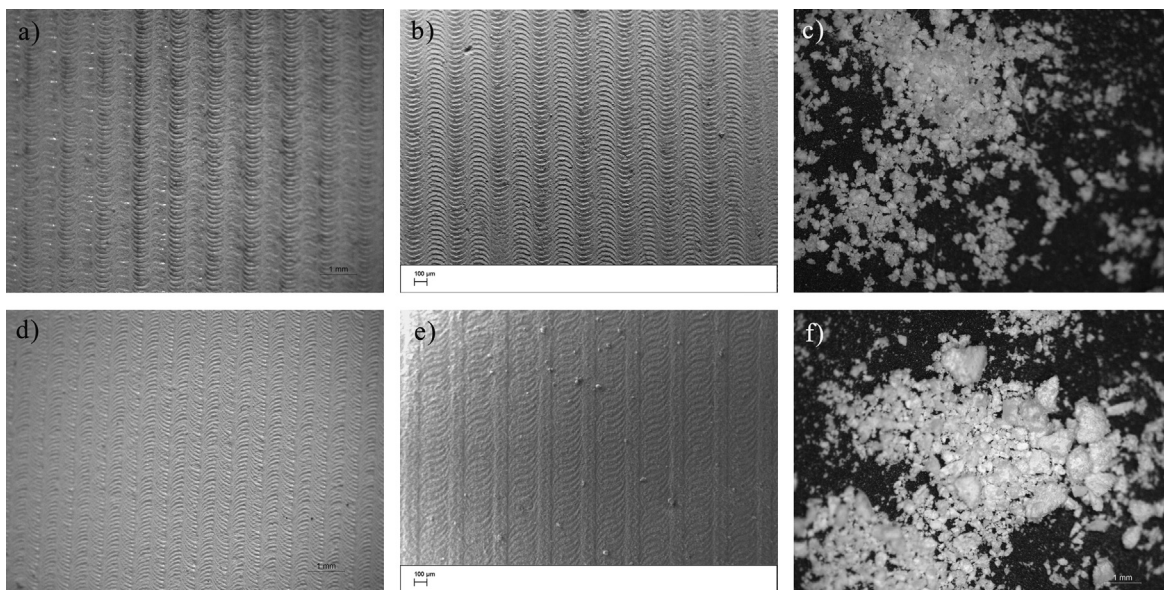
(a) Optical image, (b) SEM micrograph of machined alumina surfaces, (c) chips produced using 120 mesh conical pointed end tool, (d) optical image, (e) SEM micrograph of machined alumina surfaces, and (f) chips produced using 625 mesh conical pointed end tool during green state machining of alumina samples, respectively.
